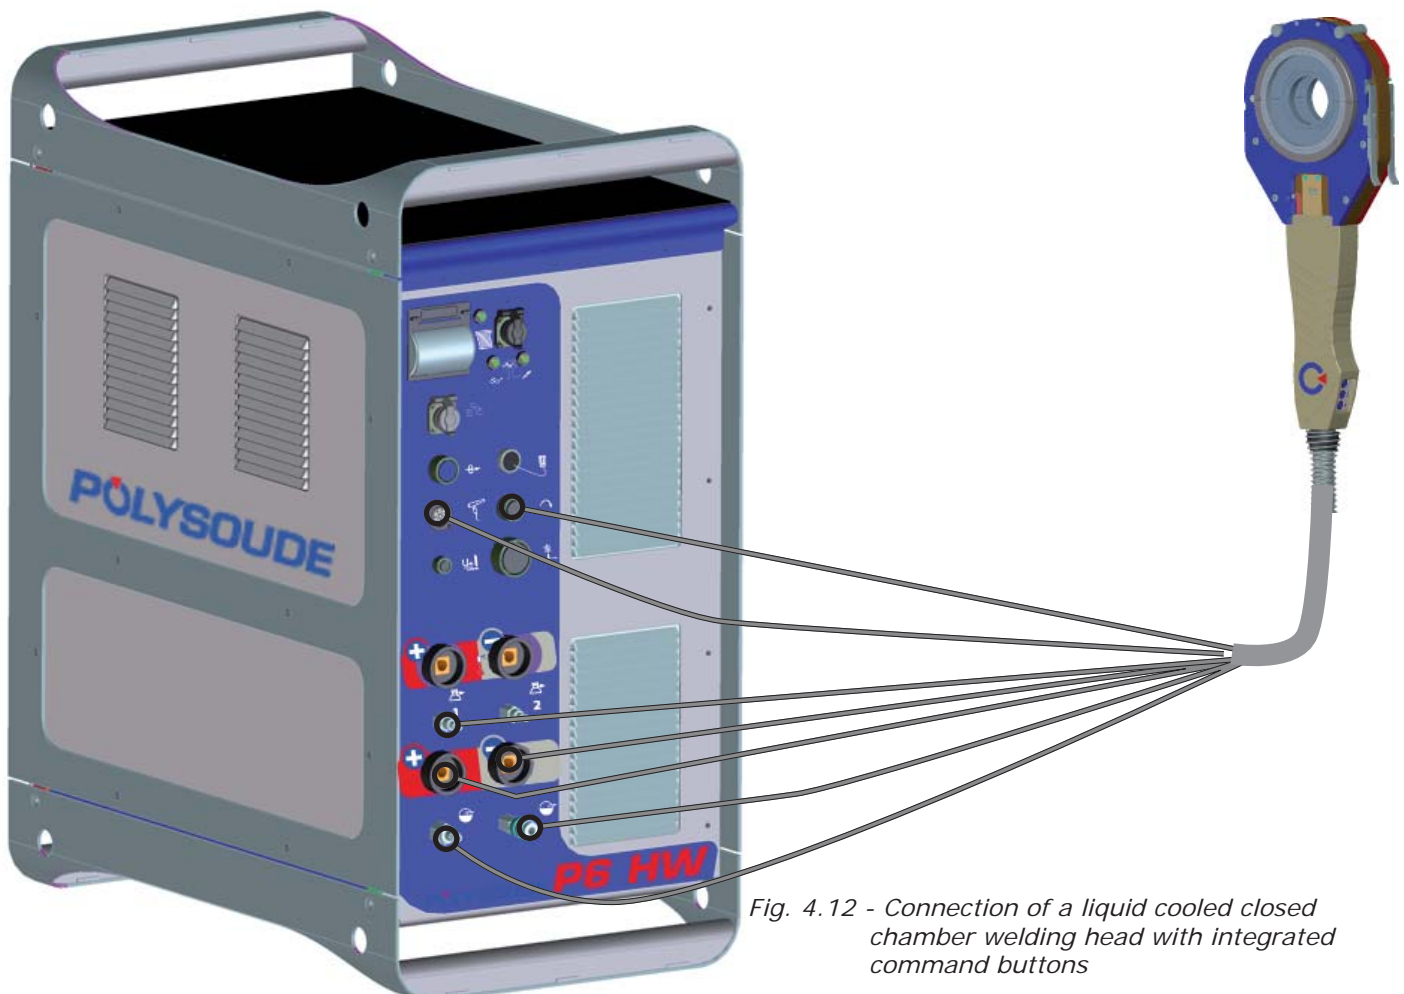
Connection of a liquid cooled closed chamber welding head with integrated command buttons
